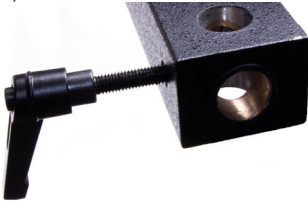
Install the clutch handle on the end of the small horizontal bar.
